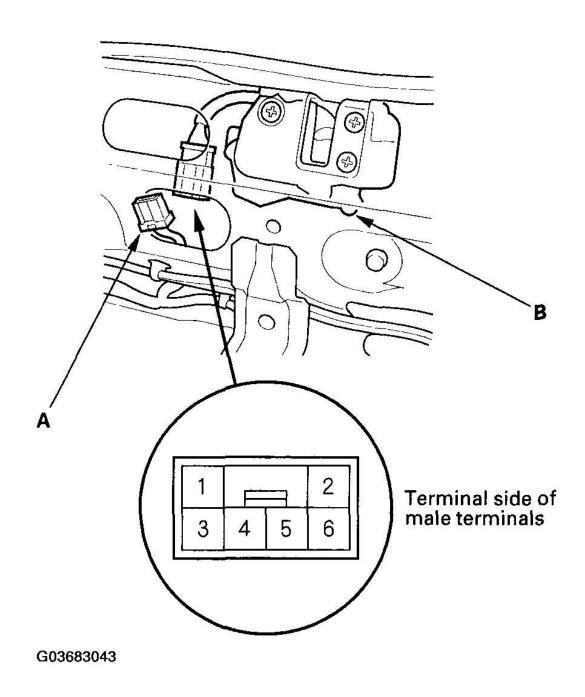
Disconnecting 6P Connector From Hatch Lock Actuator Courtesy of AMERICAN HONDA MOTOR CO., INC.
